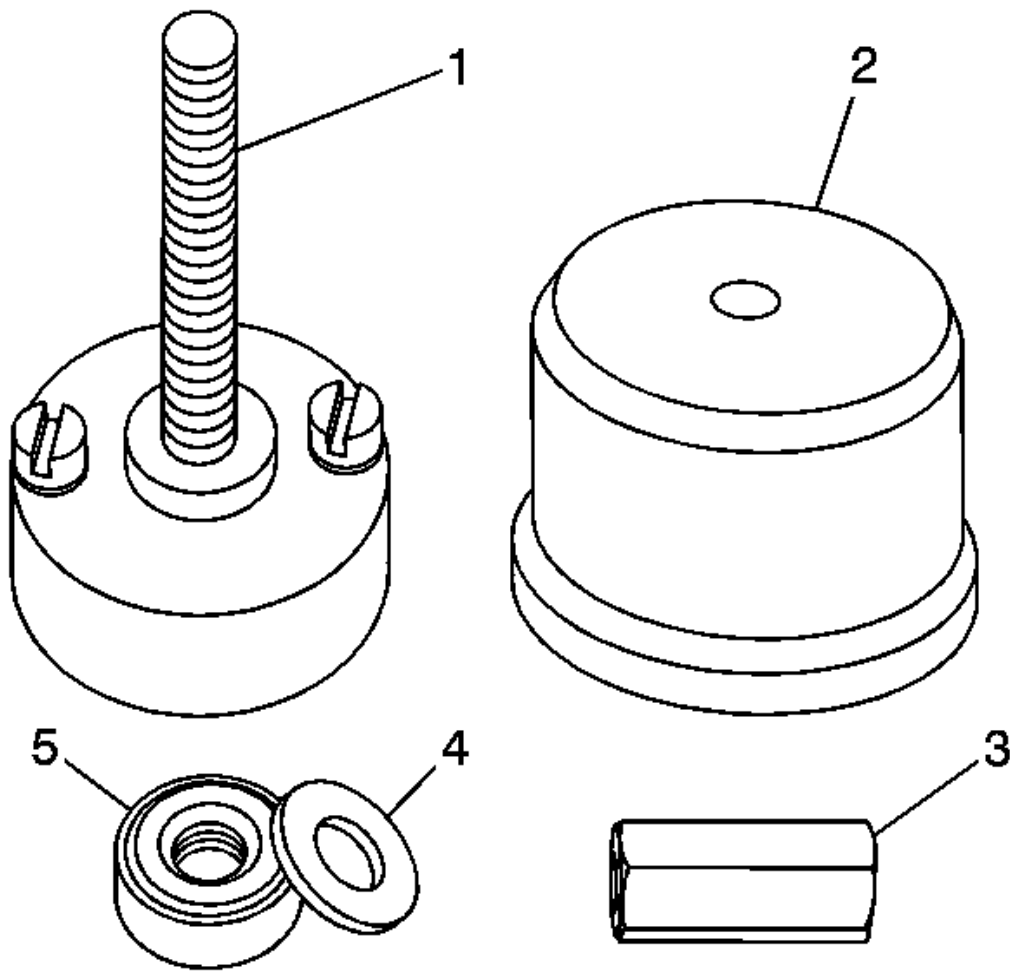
Identifying Crankshaft Rear Oil Seal Installation Tools (EN-48108)
